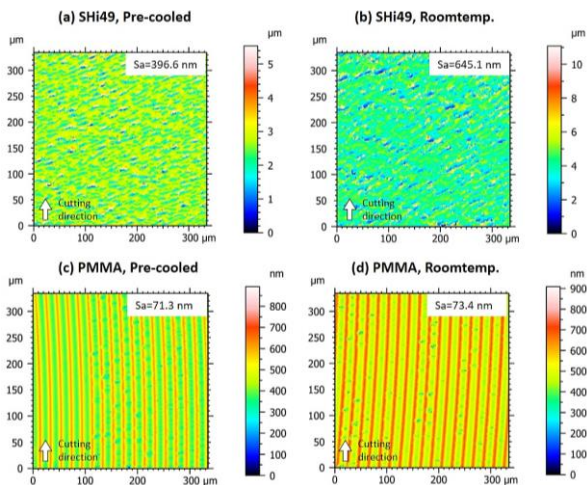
Surface texture of the machined surfaces at Pos. 2 in Fig. 3
